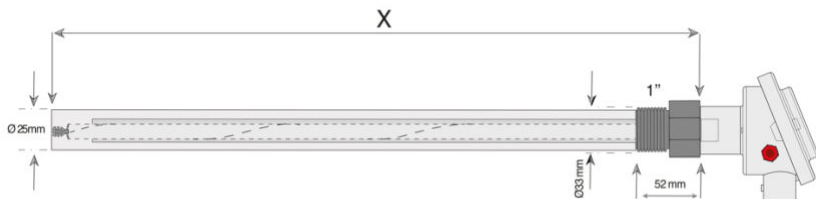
CarboProbe™ HT PRO with 1" thread and double ceramic sheath
